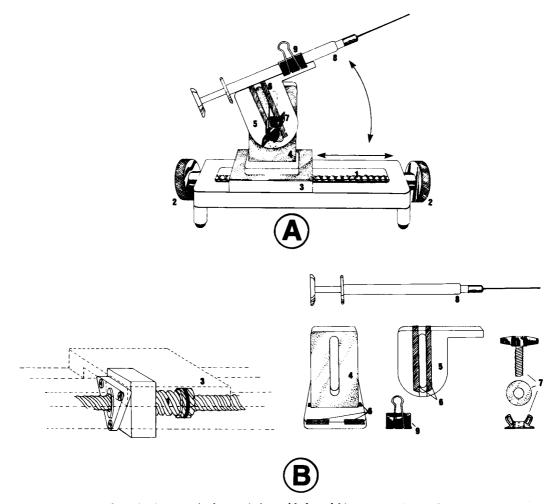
Improved semi-micro manipulator. a) Assembled, and b) cutaway view of base and disassembled pedestal. 1) helical screw, 2) control knobs, 3) sliding plate with galvanized steel plate, 4) pedestal base with galvanized steel plate, 5) pointer, 6) magnetic strips, 7) lockscrew, washer and nut, 8) microinjection apparatus, and 9) spring clamp.
